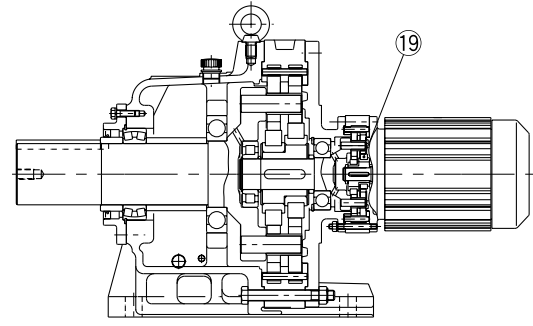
Type CHHM (Horizontal • Gearmotor)
